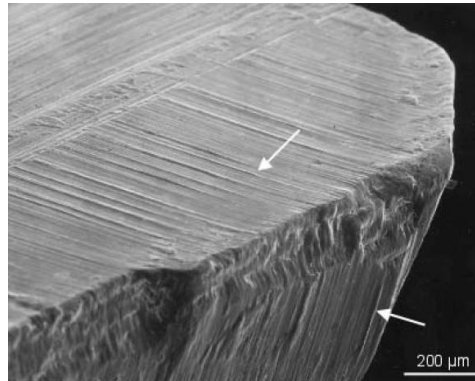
SEM micrograph showing ploughing/scratch marks on the flank and rake surfaces of a HSS cutting tool [49], with kind permission from the Society of Mechanical Engineers.
